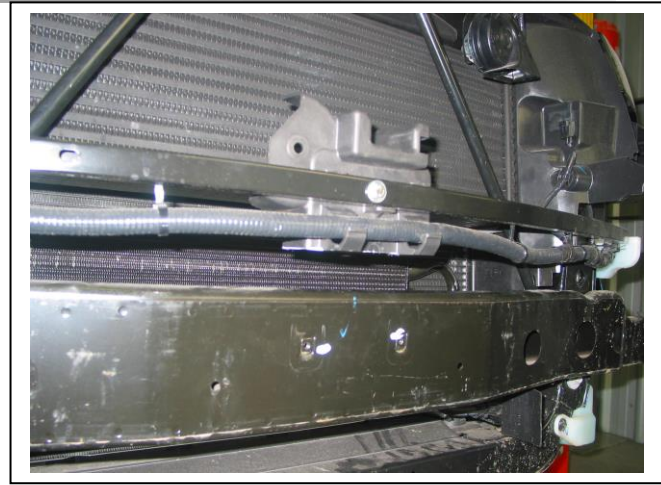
Hole drilled in grille locator and M6 x 35 bolt fitted.
